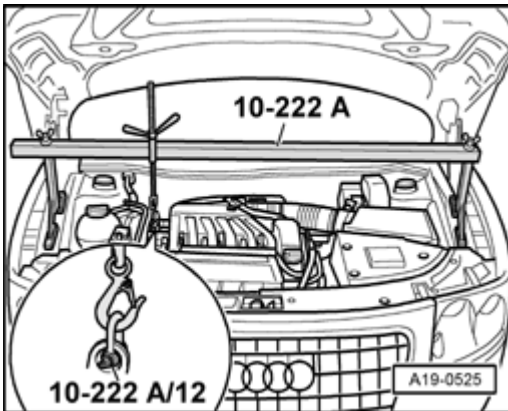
Attaching Shackle 10-222 A/12 To Right Rear Engine Lifting Eye
